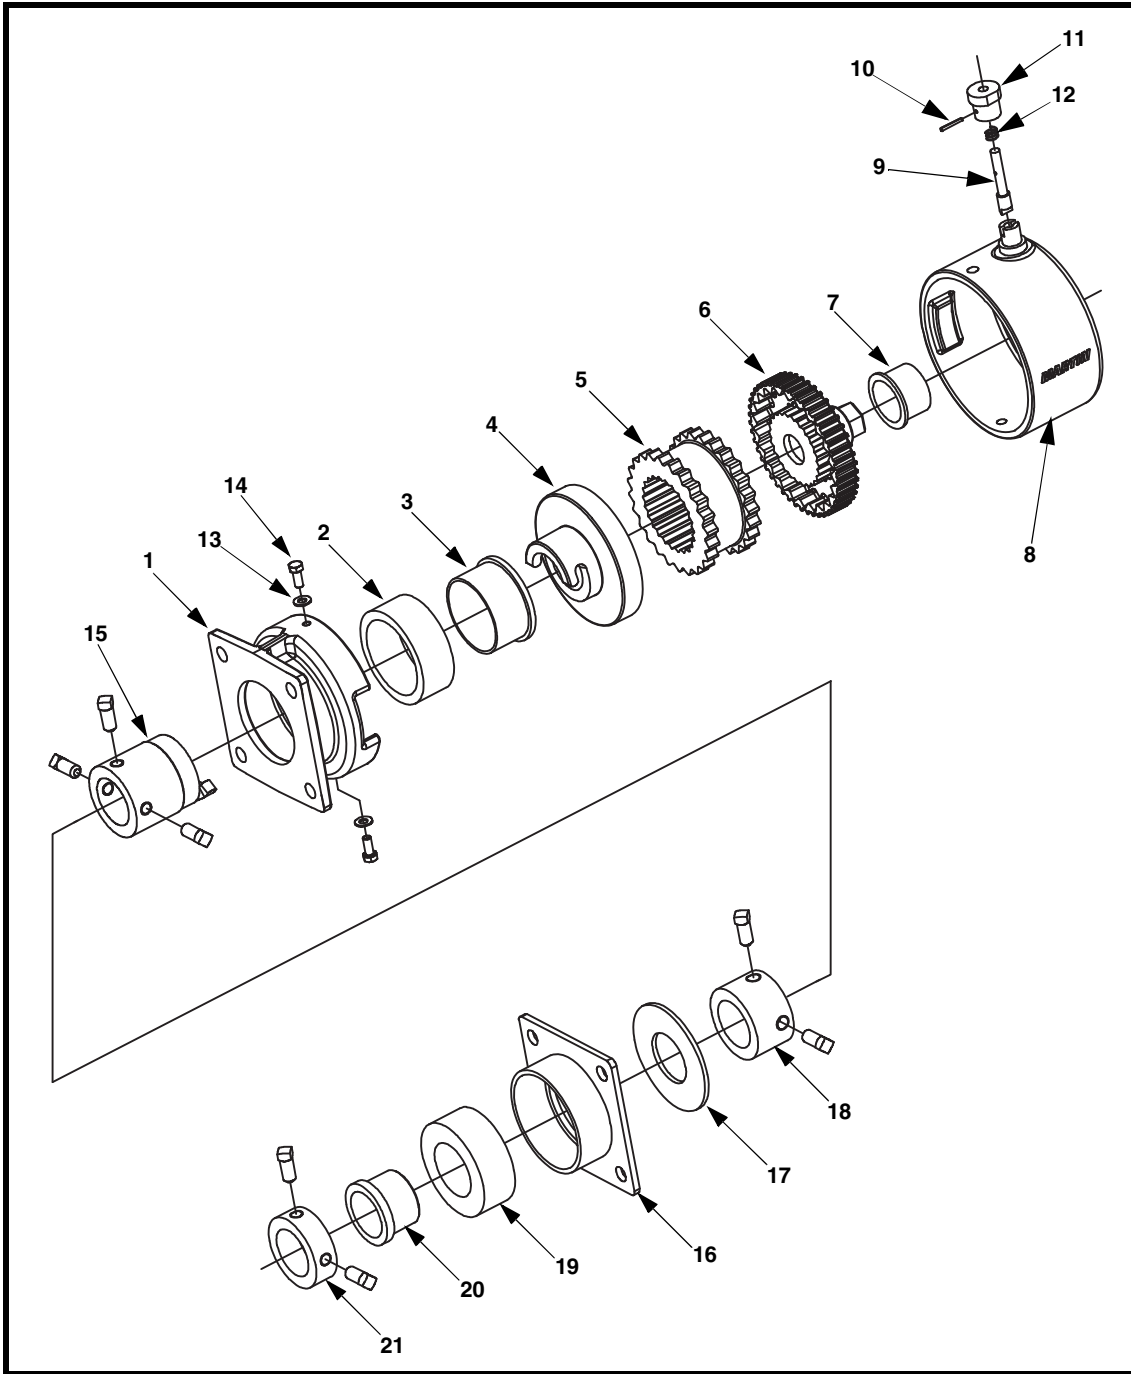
Martin® Twist Tensioner Assembly, P/N 38850-X* (Sheet 1 of 2)
